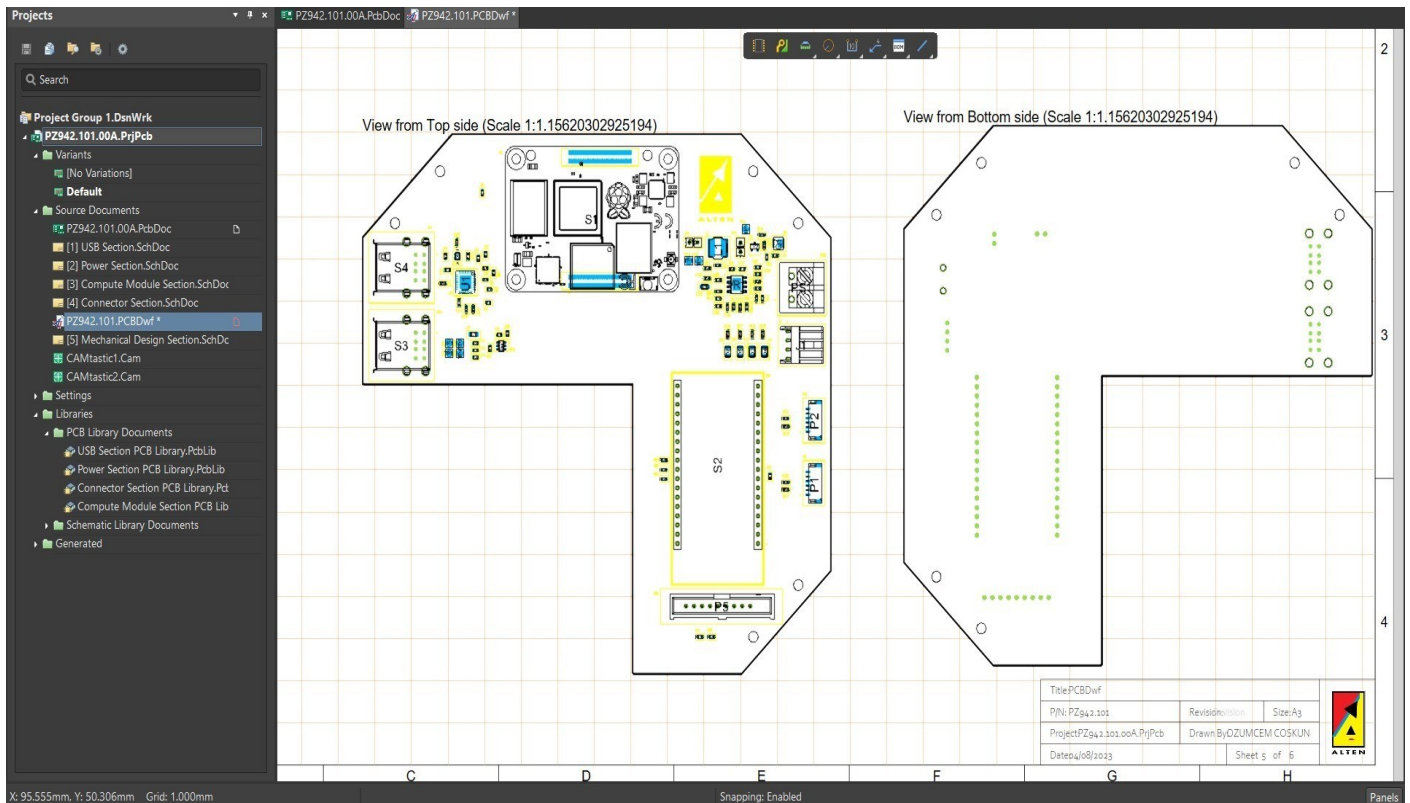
Top Side Scale and Bottom Side Scale of the PCB
